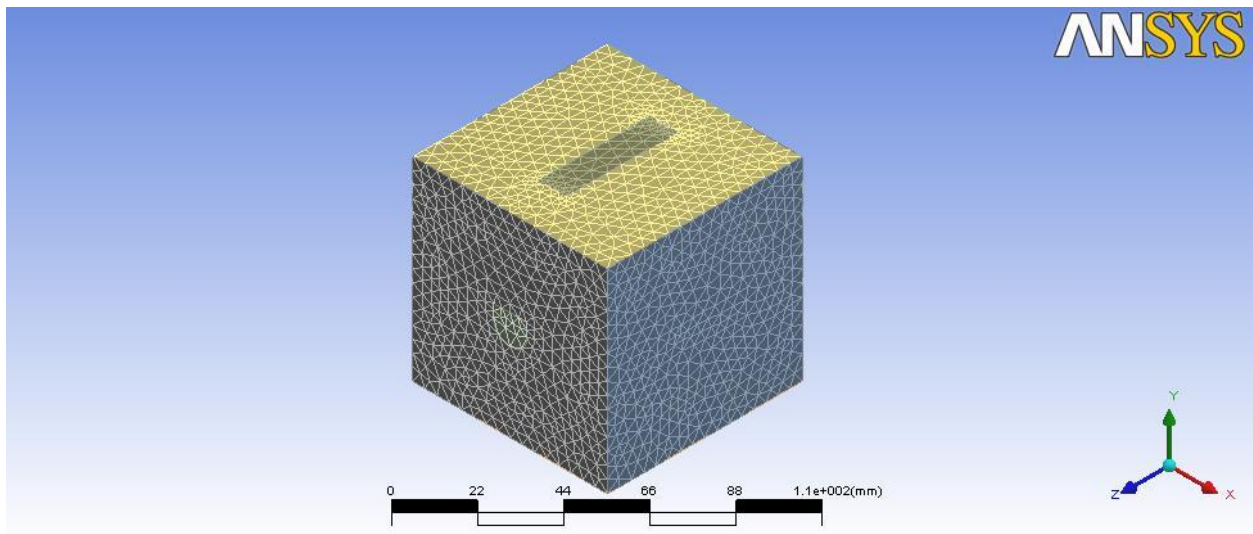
3D view for Meshing of 'D' shape cross-sectional cooling channels
